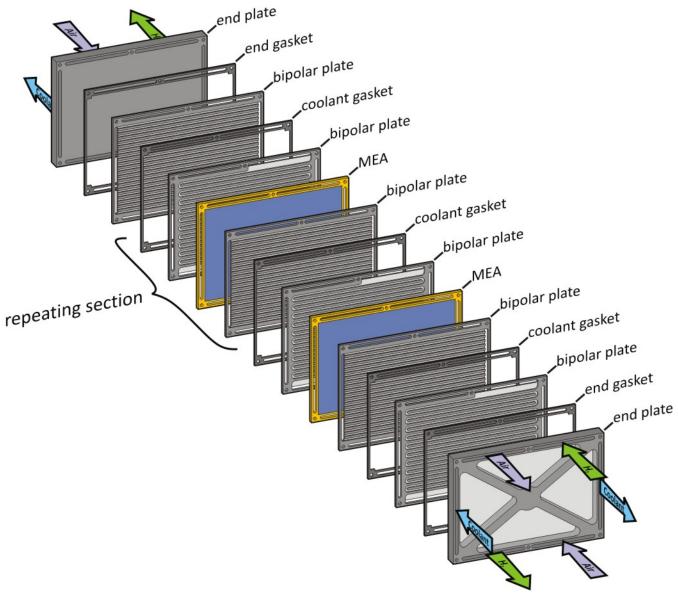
Exploded stack view (abridged to 2 cells for clarity)
